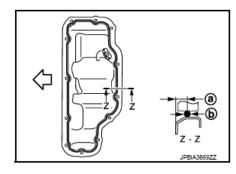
Identifying Liquid Gasket Applying Dimension Of Oil Pan (Lower) Courtesy of NISSAN MOTOR CO., U.S.A.
